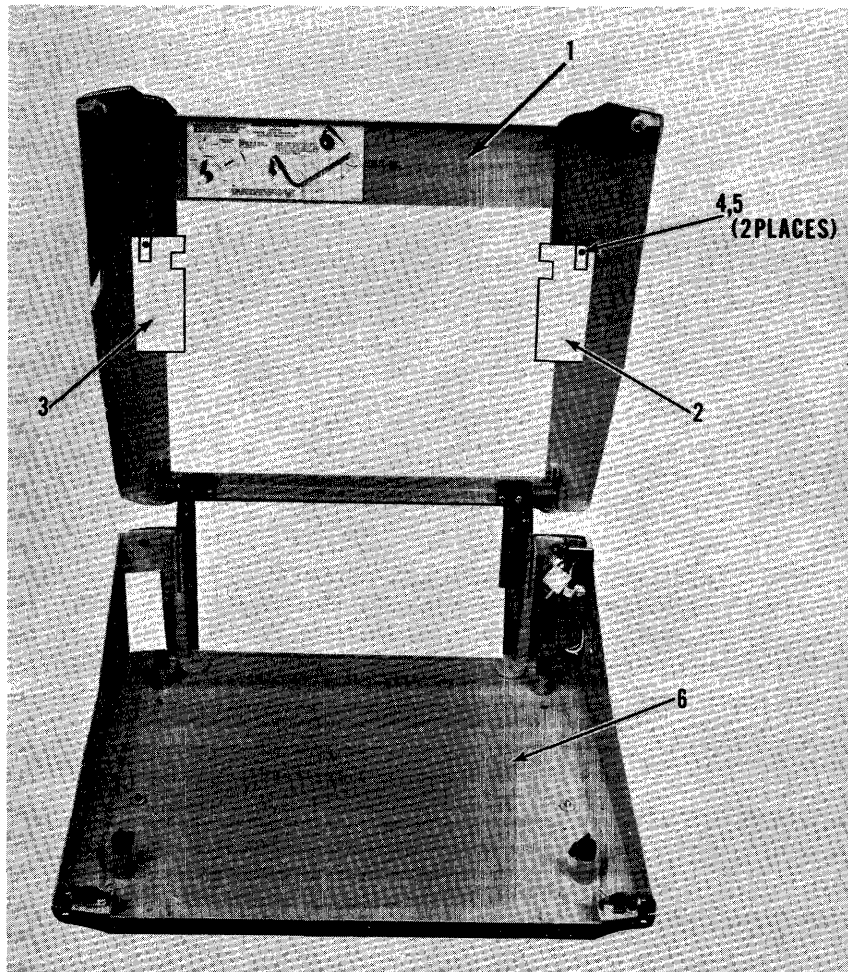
Top-Bottom Cover Assembly, TermiNet 1200 B Printer
